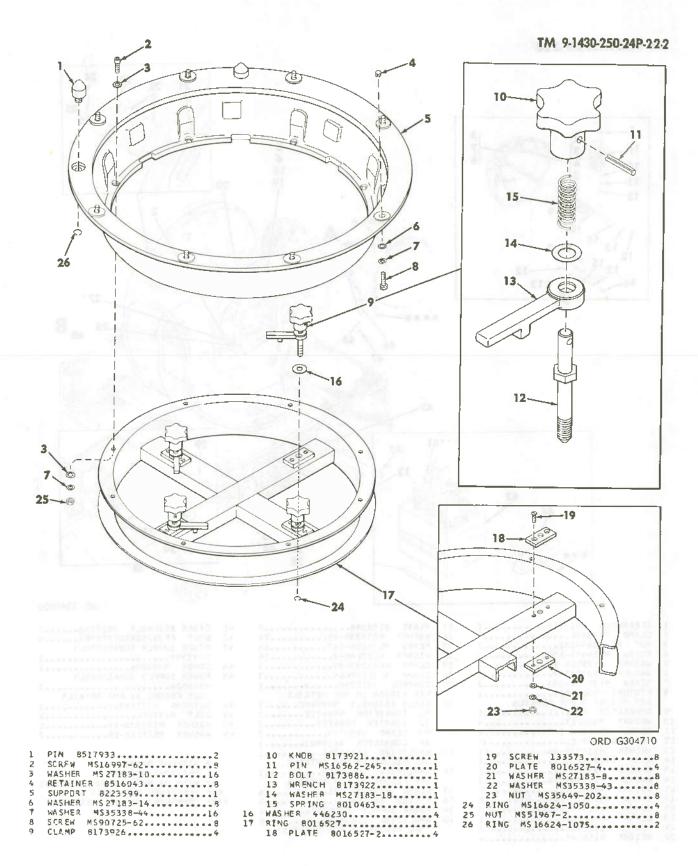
SUPPORT /8016541/-EXPLODED VIEW
